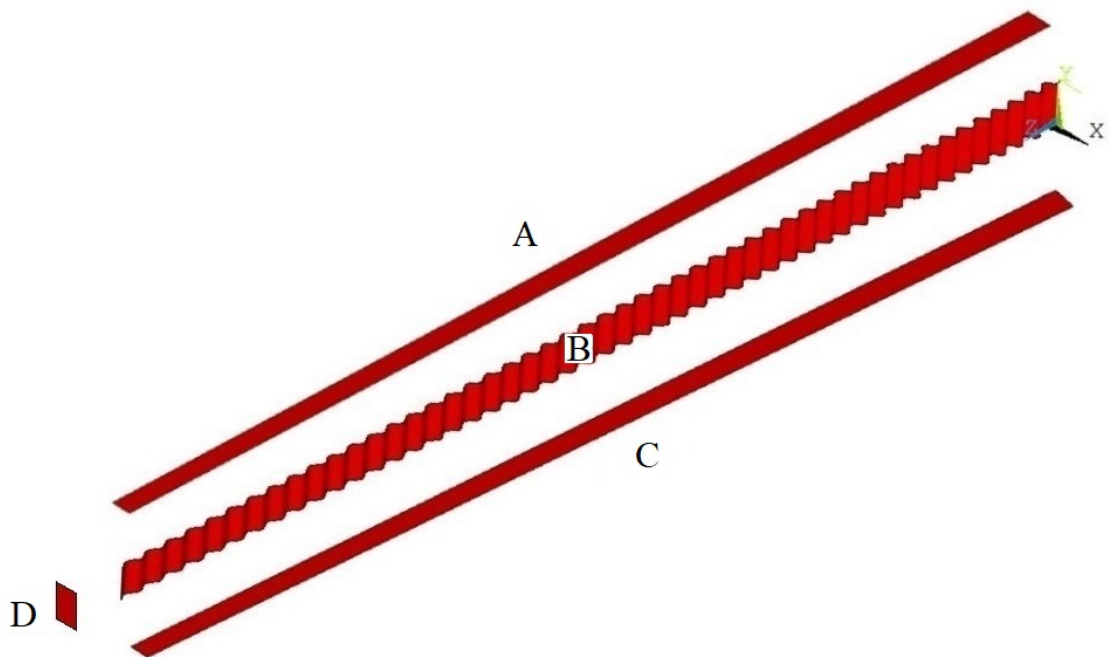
Parts of the spar model. (A) Top flange, (B) web, (C) bottom flange and (D) free end cover.
